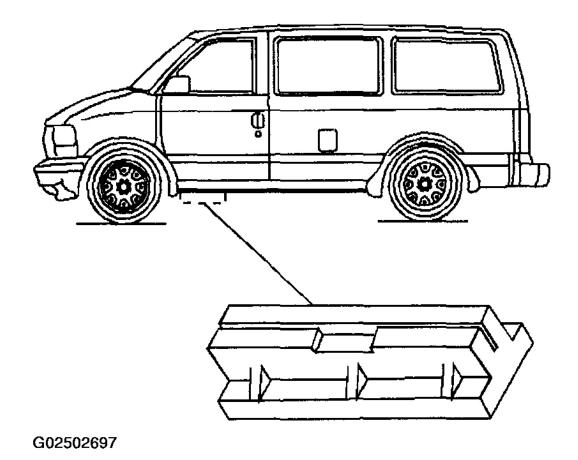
Installing Front Section Of Running Boards Courtesy of GENERAL MOTORS CORP.
